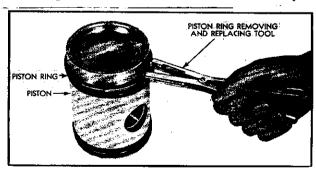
Removing and Replacing Piston Rings with Tool KMO-232.
